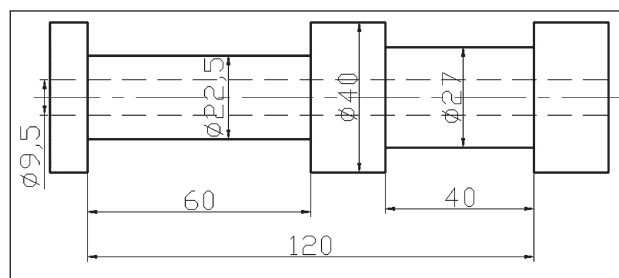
The product drawing of CWR asymmetrical hollow shaft
